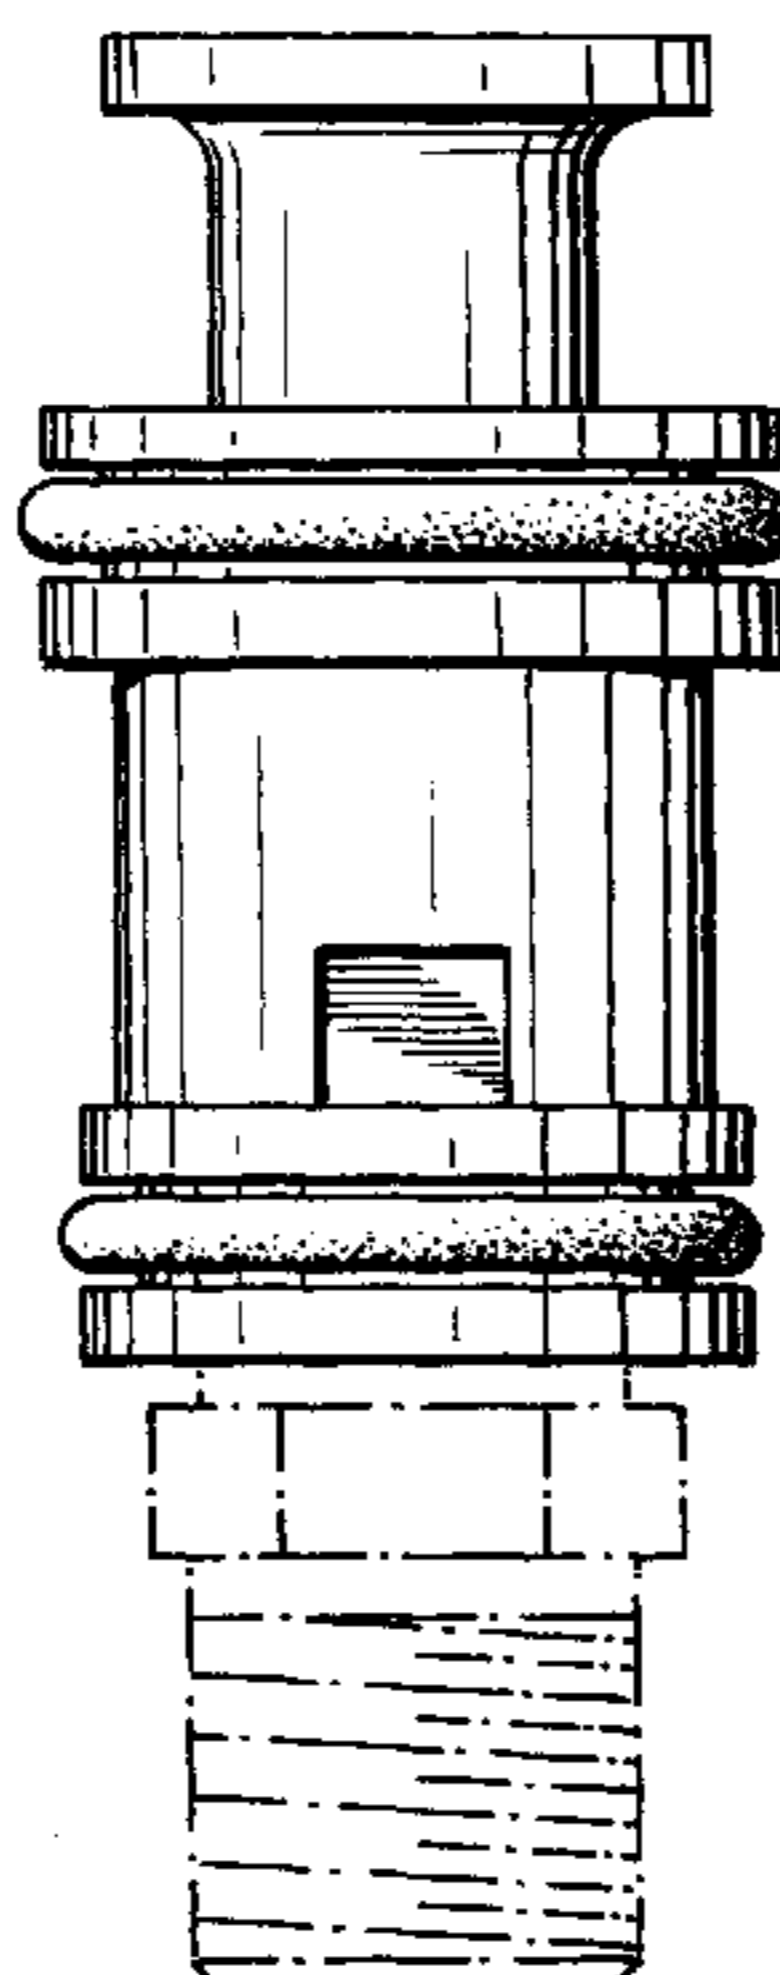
is a right side view of the device shown in FIG. 6, the left side being a mirror image thereof;
